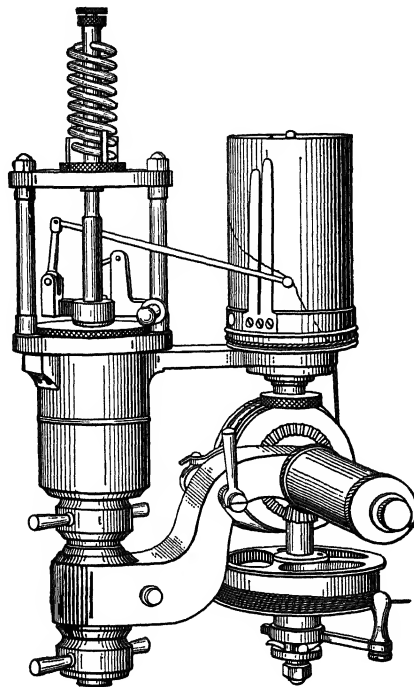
CROSBY INDICATOR WITH REDUCING WHEEL.
